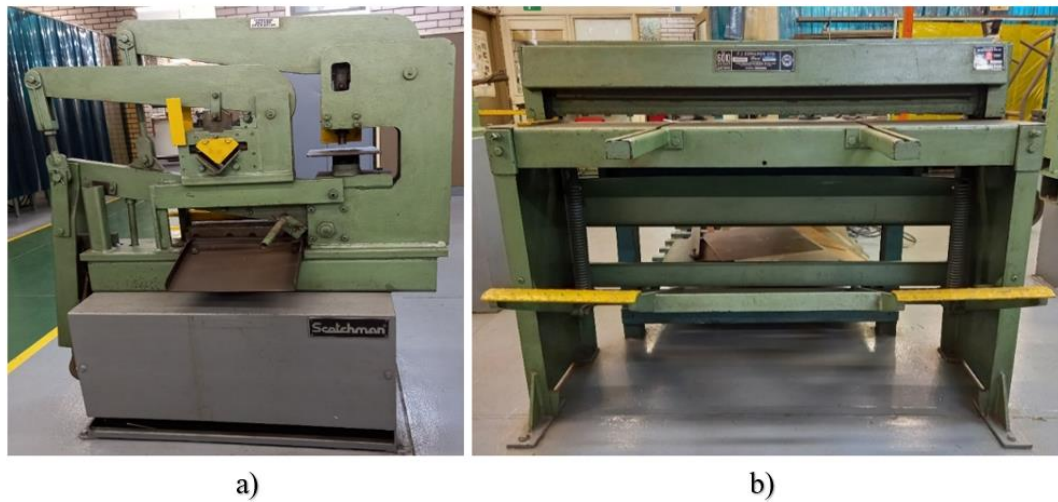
Guillotine machines that cut up to 5mm (a) and 3mm (b) thickness, respectively.
